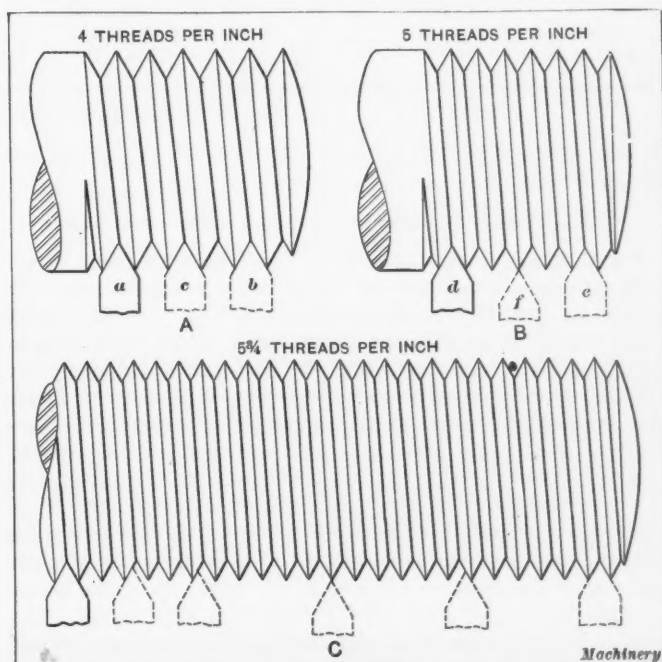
Relation between Position of Tool and Screw Threads having Even, Odd, and Fractional Numbers of Threads per Inch
